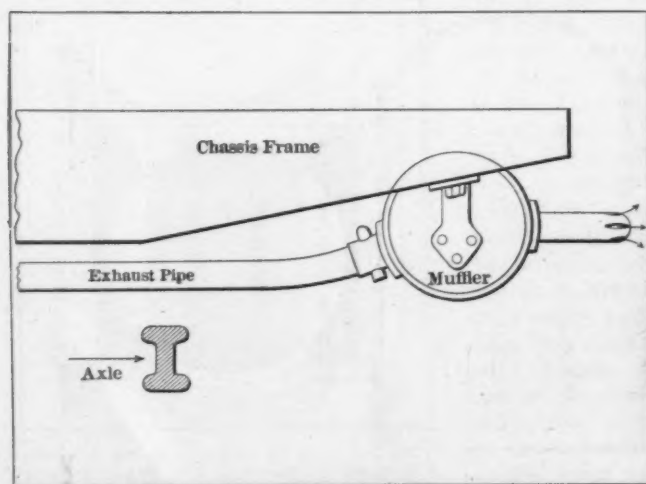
Faulty method of suspending muffler, showing exhaust pipe in the right position
